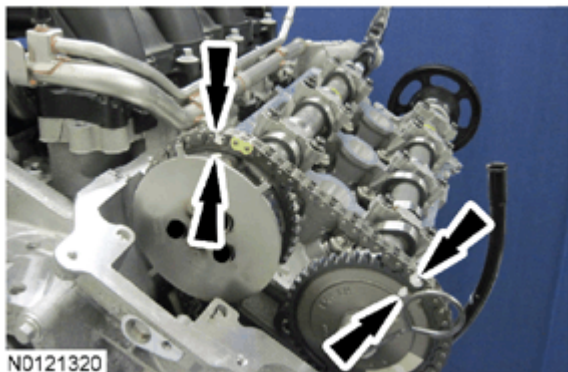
Positioning LH Camshaft Phaser And Sprocket Into Timing Chain With Alignment Marks
